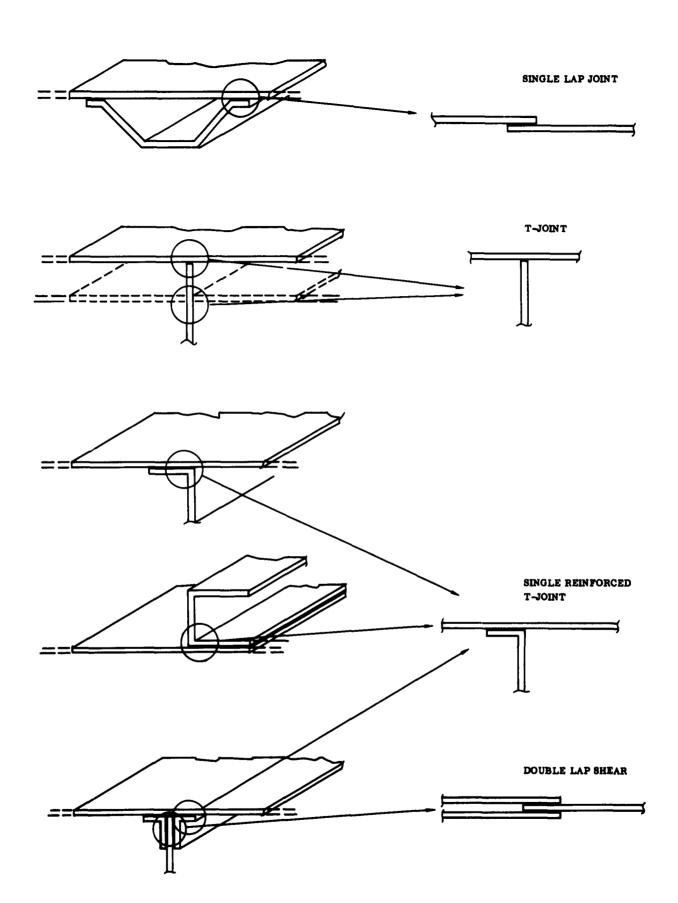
STRUCTURAL ELEMENTS AND STUDY JOINTS
